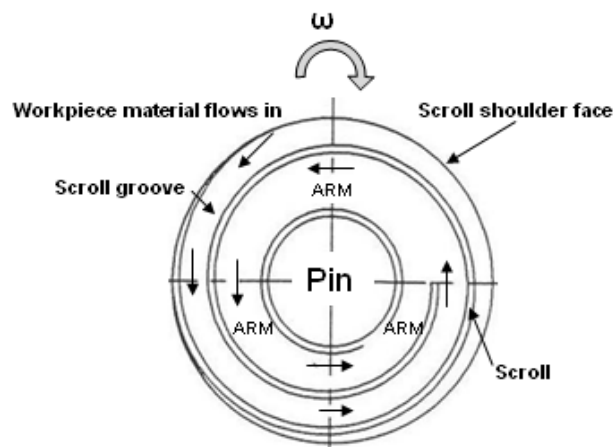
Schematic illustration of scroll shoulder tool FSW process, components of scroll shoulder and tapered thread pin tool and denotation of material flow (dimension of tool and weld zone are not to scale)
